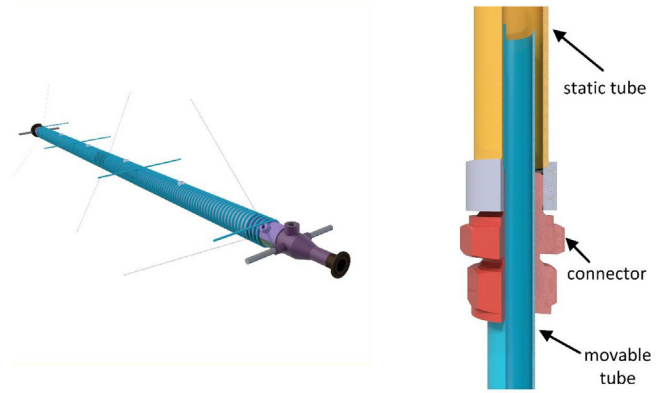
Left: drawing of the condenser tube. Heating wire marked in blue. Right: Section view of the connection of the static and the movable downcomer tube.
